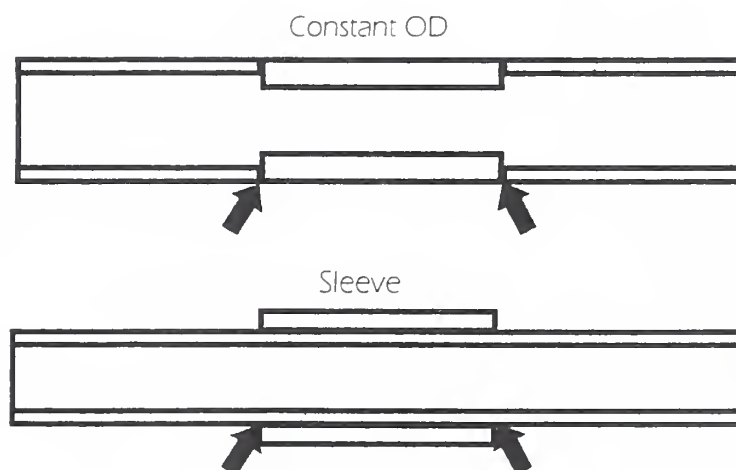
Conventional processes to manufacture tailored tubes. Above is shown the butt welding of two tubes with different thickness, below is shown the welding of a sleeve to a plain tube. The red arrows indicate the areas of (laser) welding.
